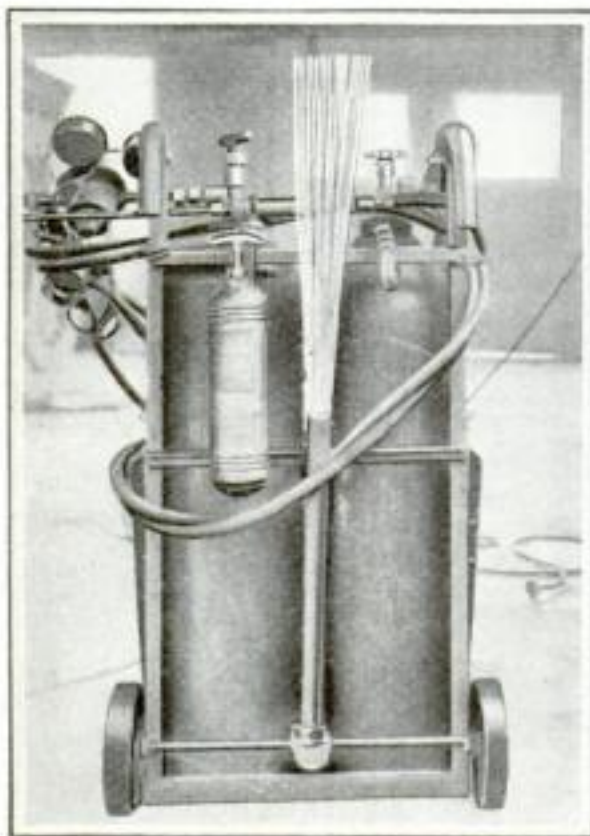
Rear view of the truck, showing the extinguisher and container for welding rods.
